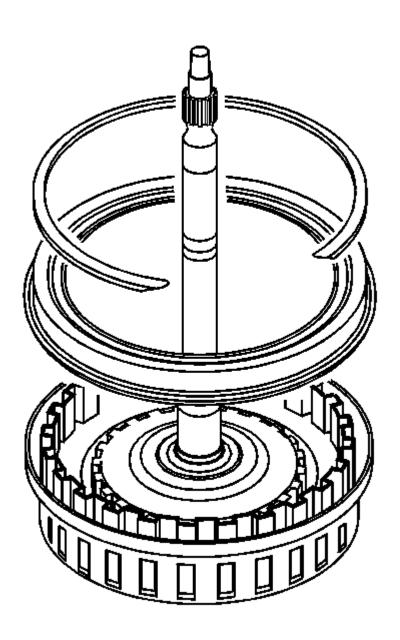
1-2-3-4 Clutch Piston Component View Courtesy of GENERAL MOTORS CORP.
